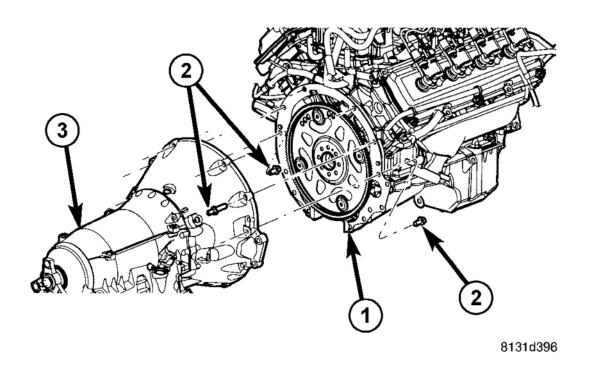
Remove/Install Transmission to Engine Bolts Courtesy of CHRYSLER LLC
